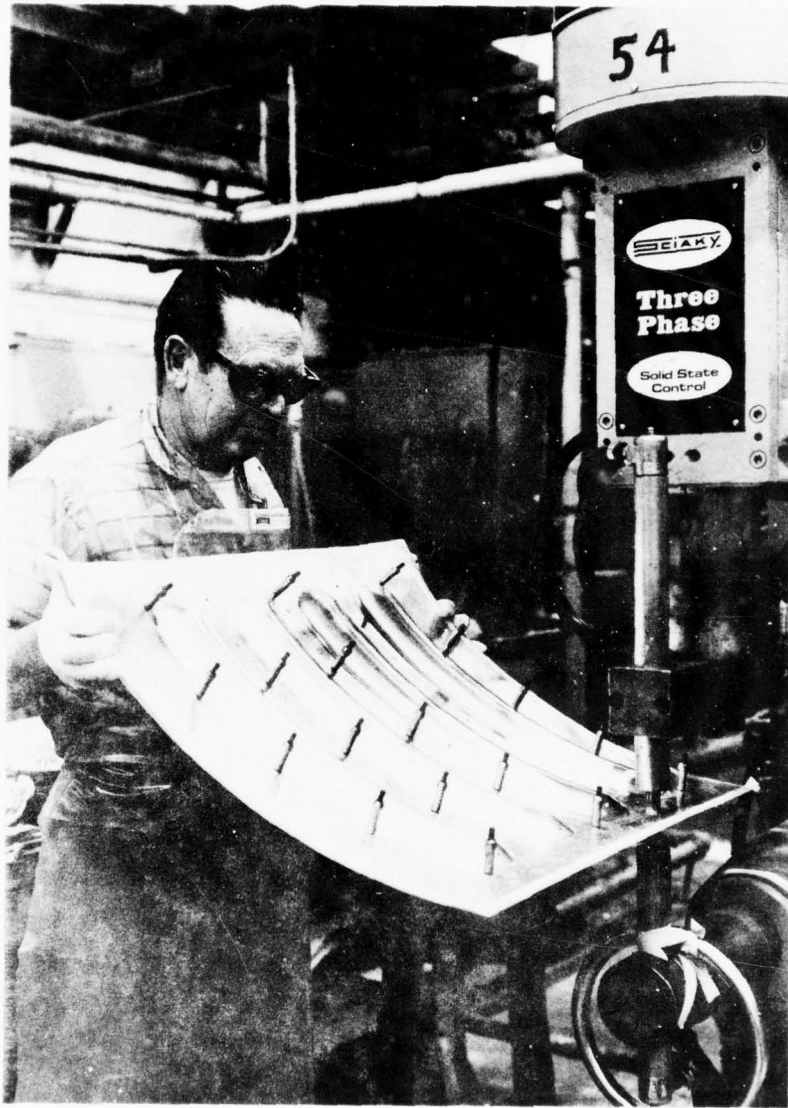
A-10 SKIN/BEADED PAN DETAILS P/N 160D215002-41 COVER,
